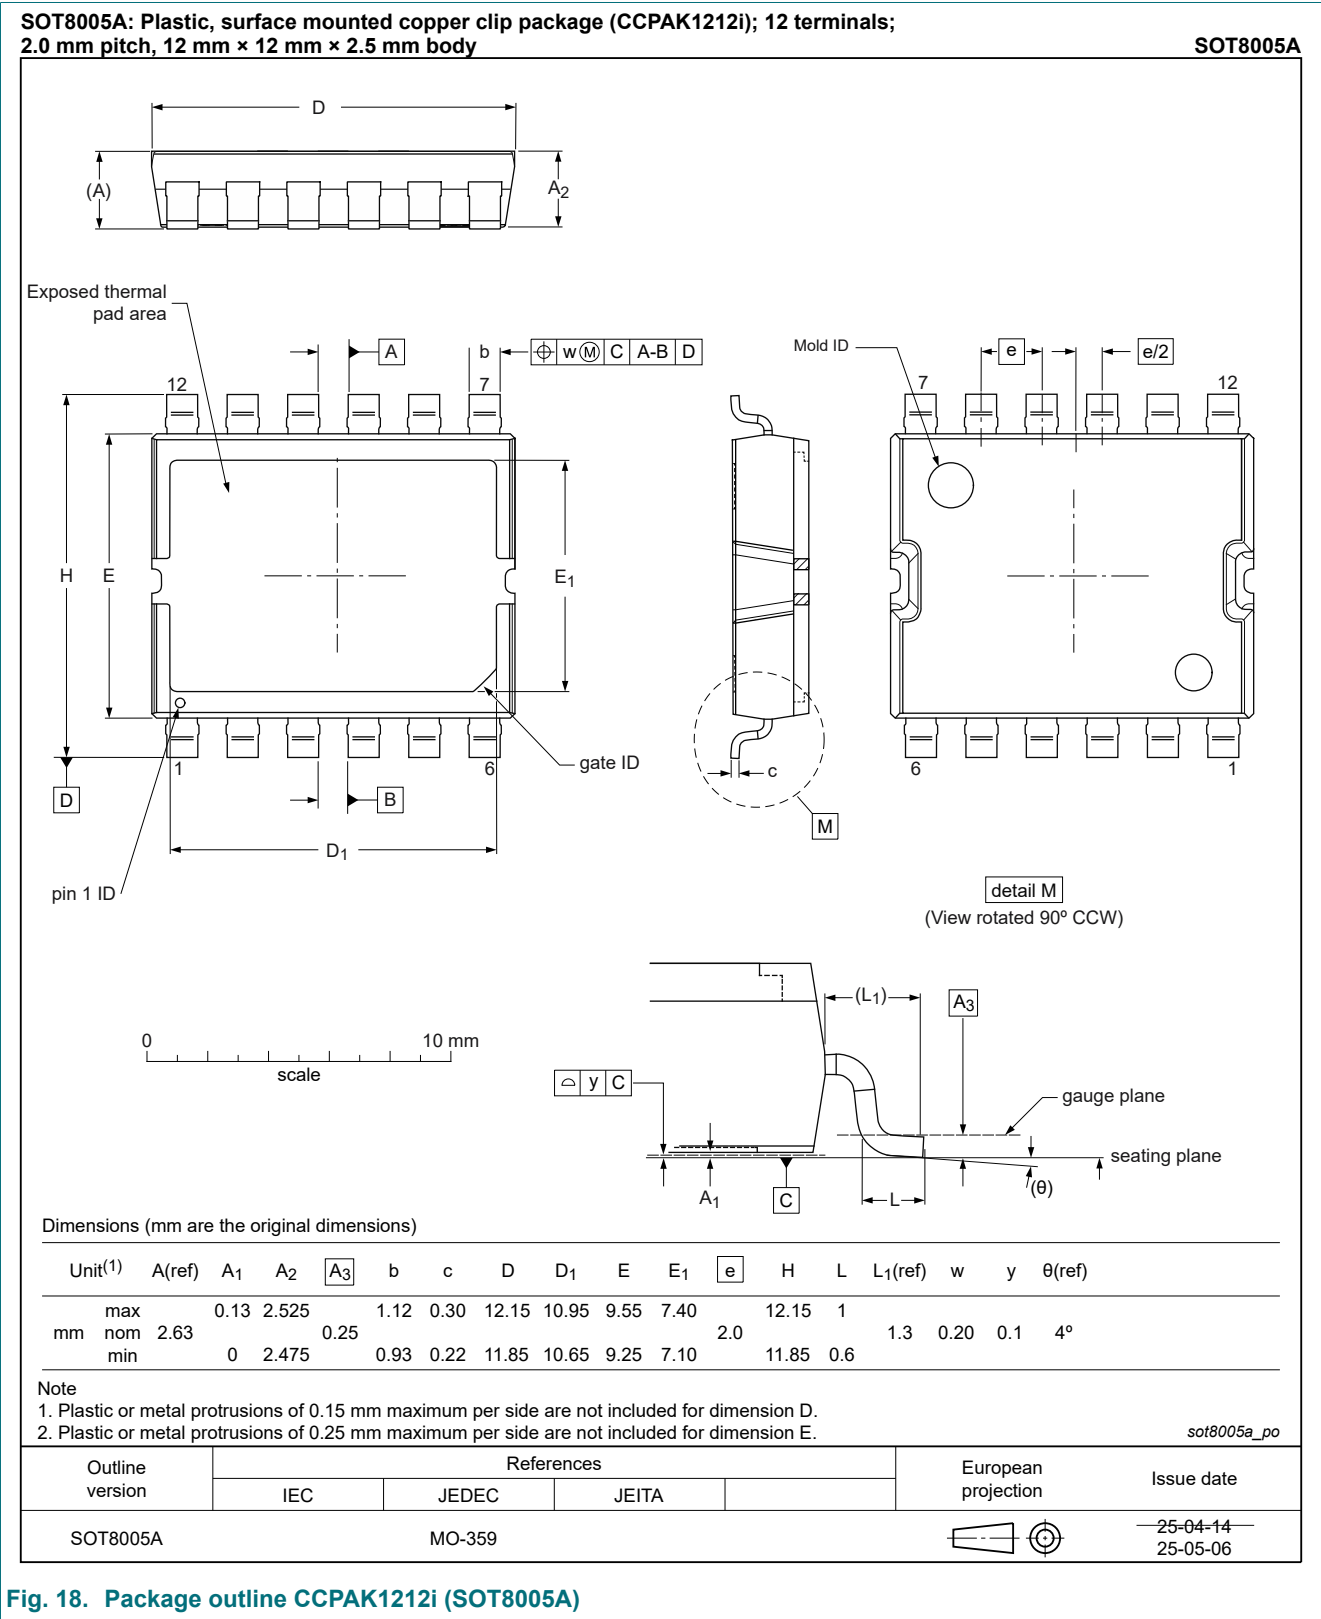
Package outline CCPAK1212i (SOT8005A)
